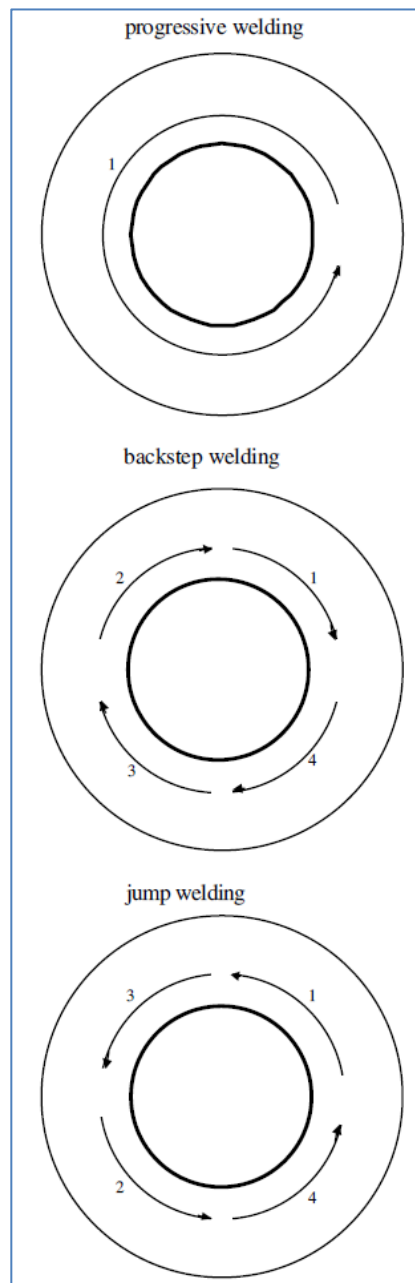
Various Welding Sequences for Circumferential welds
